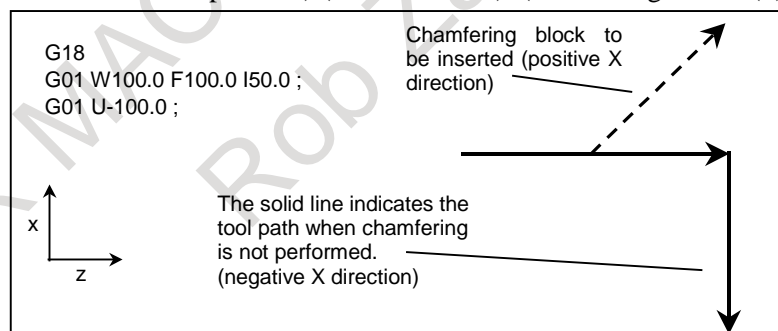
(b) Example of machining which causes alarm PS0051
